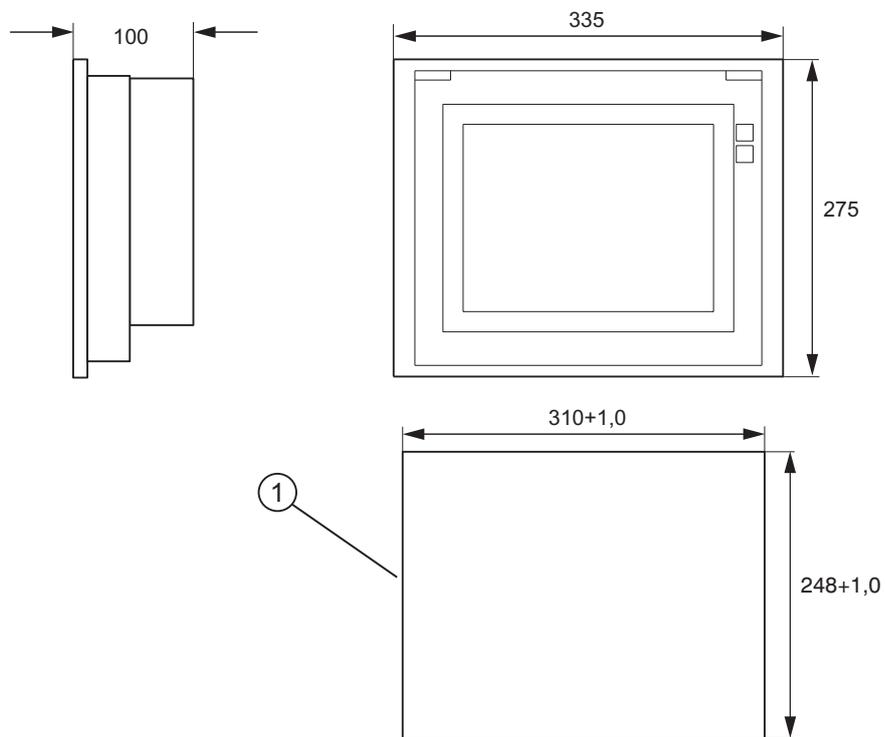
Dimension drawings for the C7-636 Touch (dimensions in mm)
